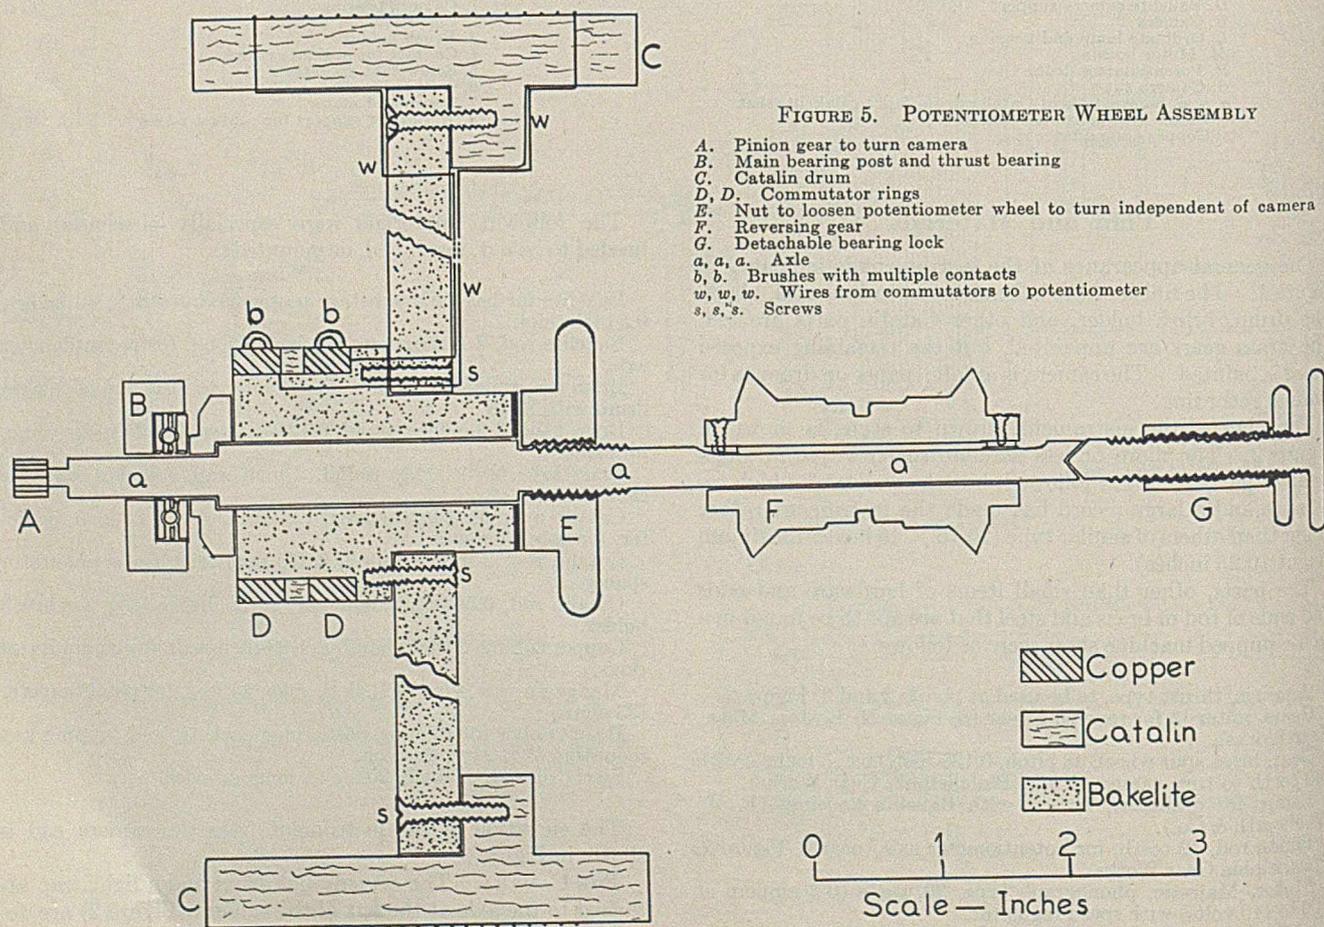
POTENTIOMETER WHEEL ASSEMBLY
